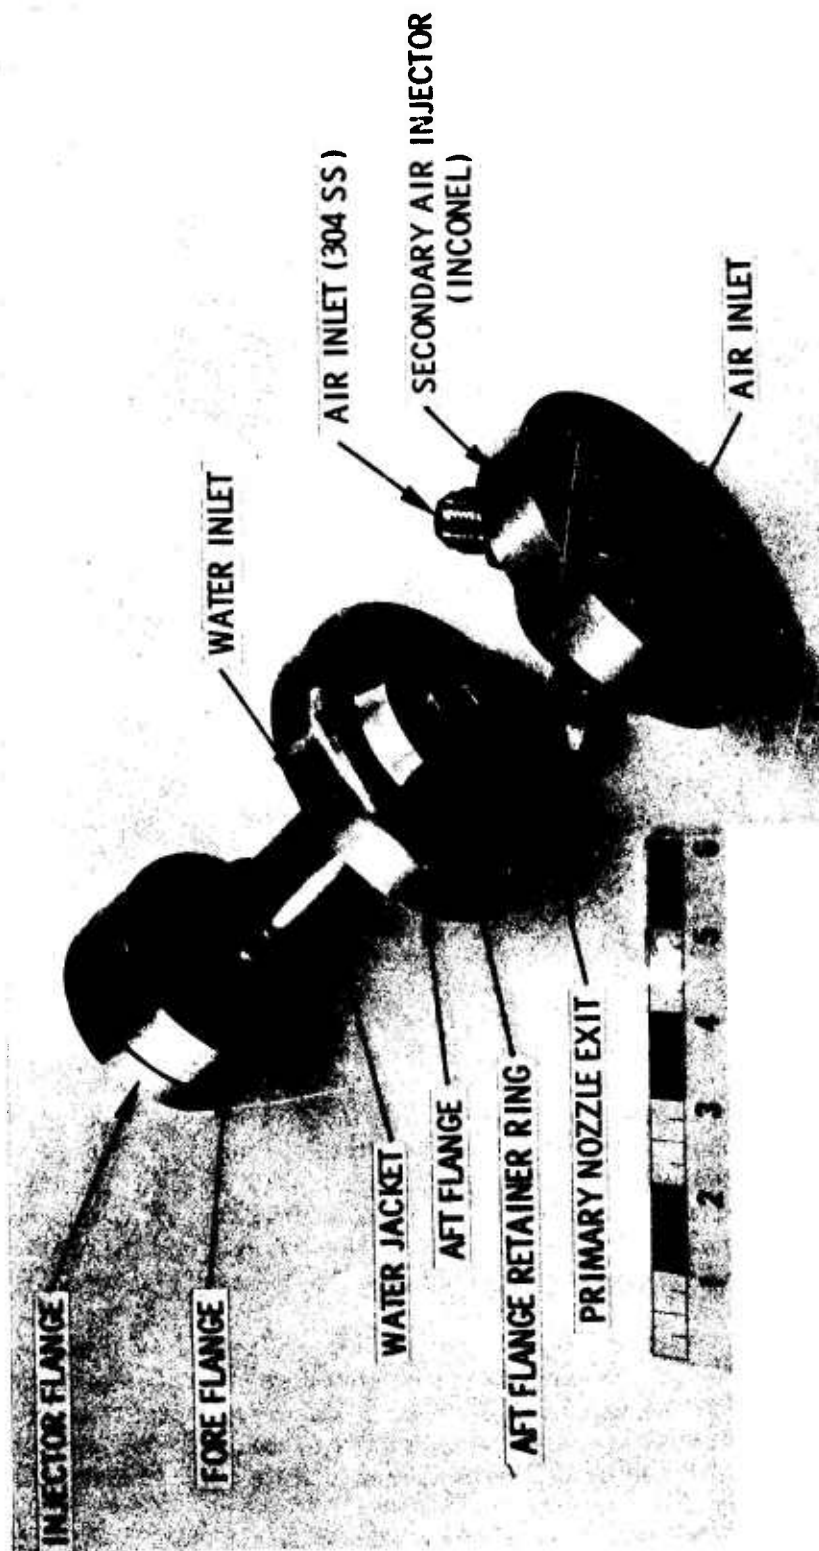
Assembled Primary Combustor and Secondary Air Injector
